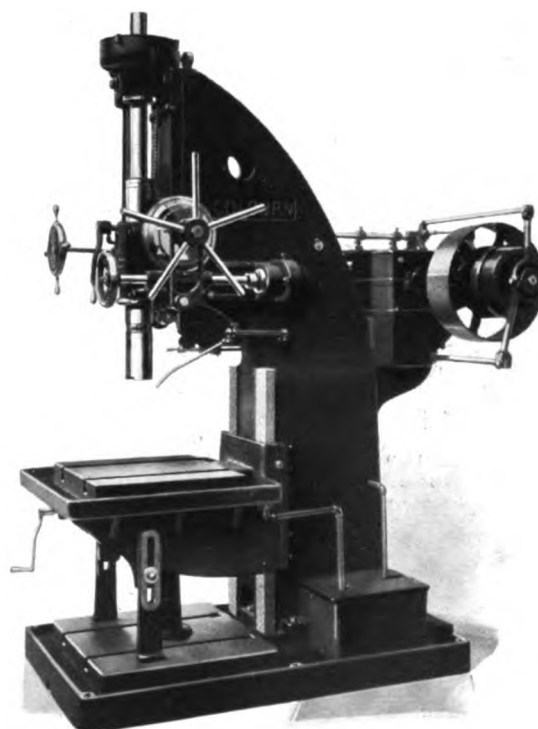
D-6 Colburn Heavy Duty Drill Press
